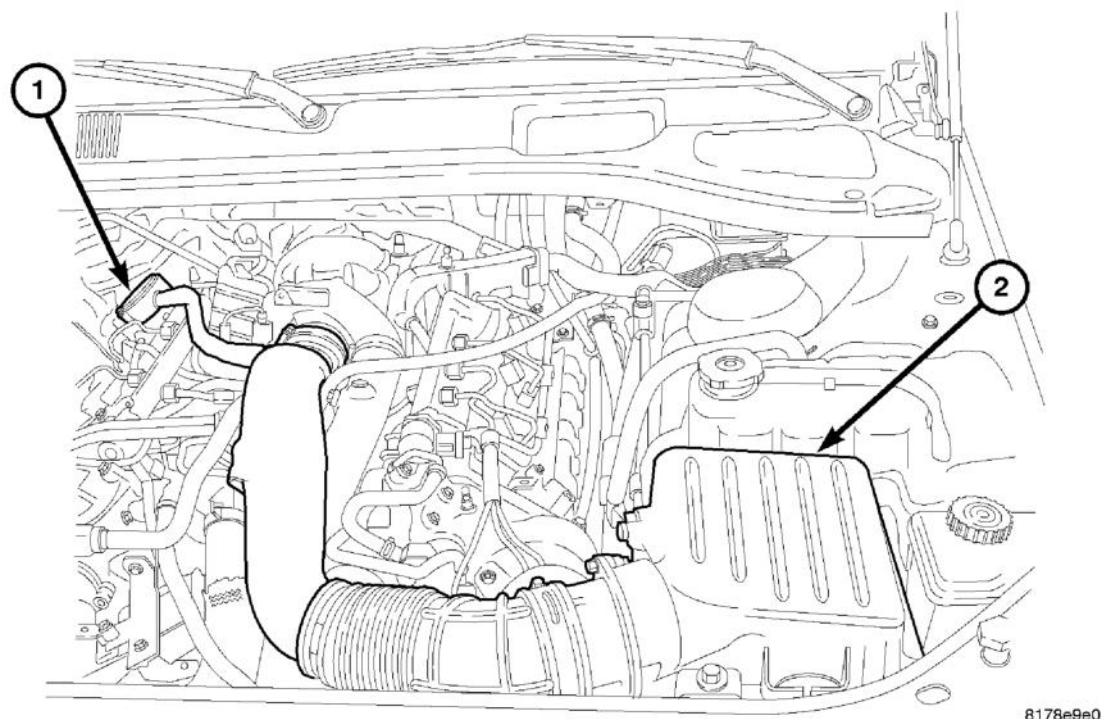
Air Cleaner Cover & Inlet Tube To Turbocharger
